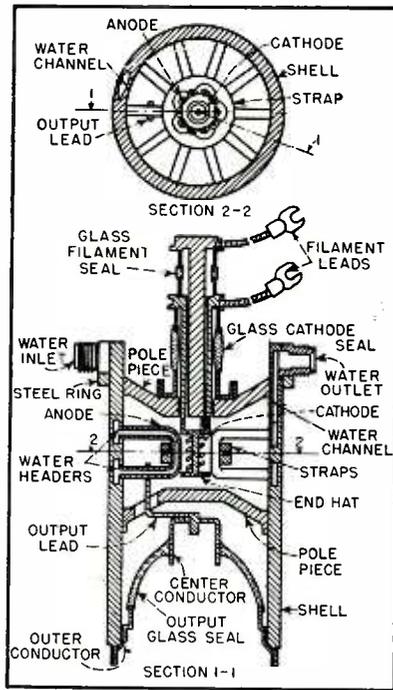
Cross-sectional view of a 5-kw water-cooled magnetron
